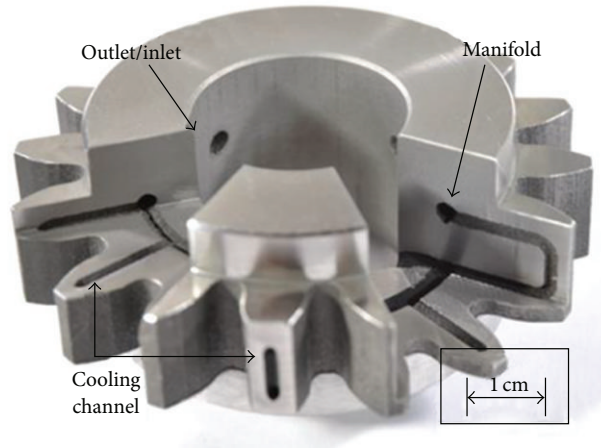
Additive manufactured gear with integrated coolant channels [1].
